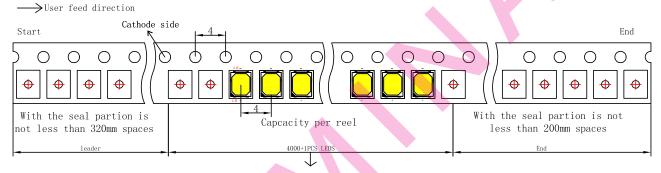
Pocket tape dimensions for LUXEON SunPlus 2835 Line.
